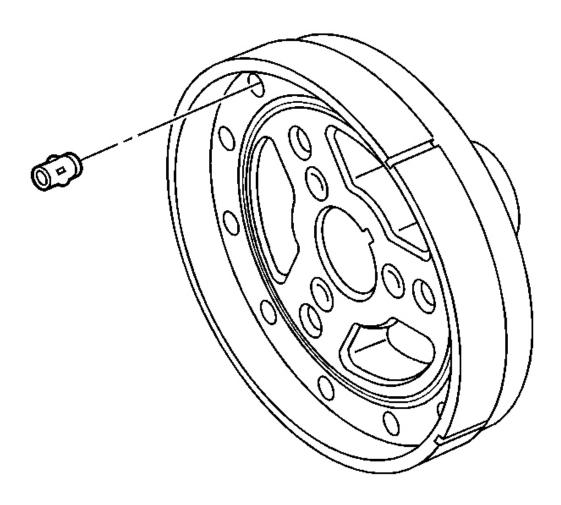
View Of Crankshaft Balancer Weights Courtesy of GENERAL MOTORS CORP.
